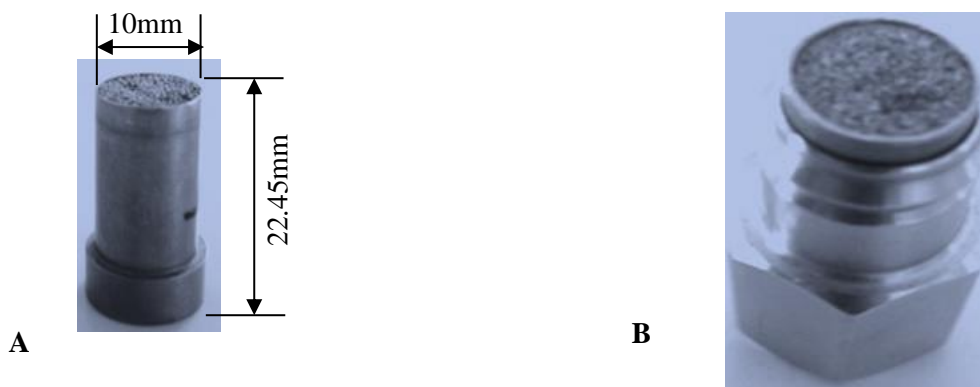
Sintered porous platen assembly showing (A) sintered porous platen, and (B) porous platen mounted in a sleeve.
